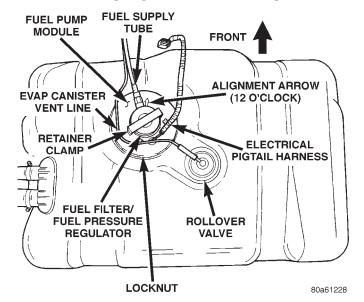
Fuel Tank/Fuel Pump Module (Top View)
